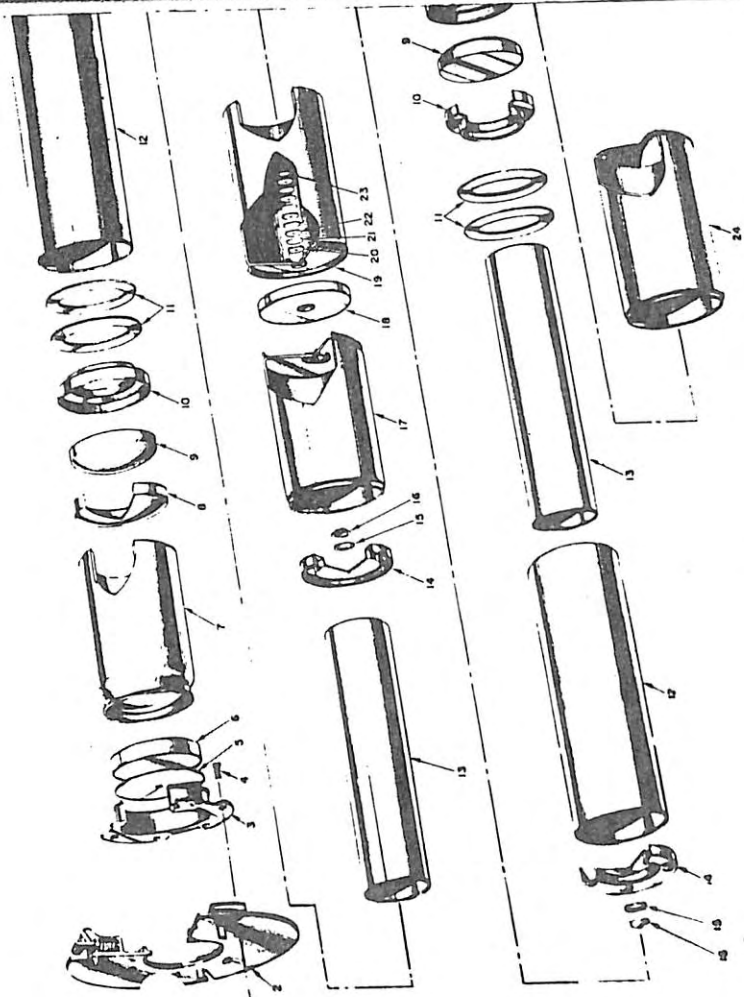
Isometric Cutaway of Fuel Capsule Assembly
